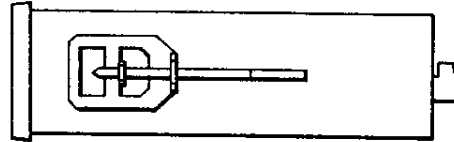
Simplified 'exploded' view of panel mounting totaliser
